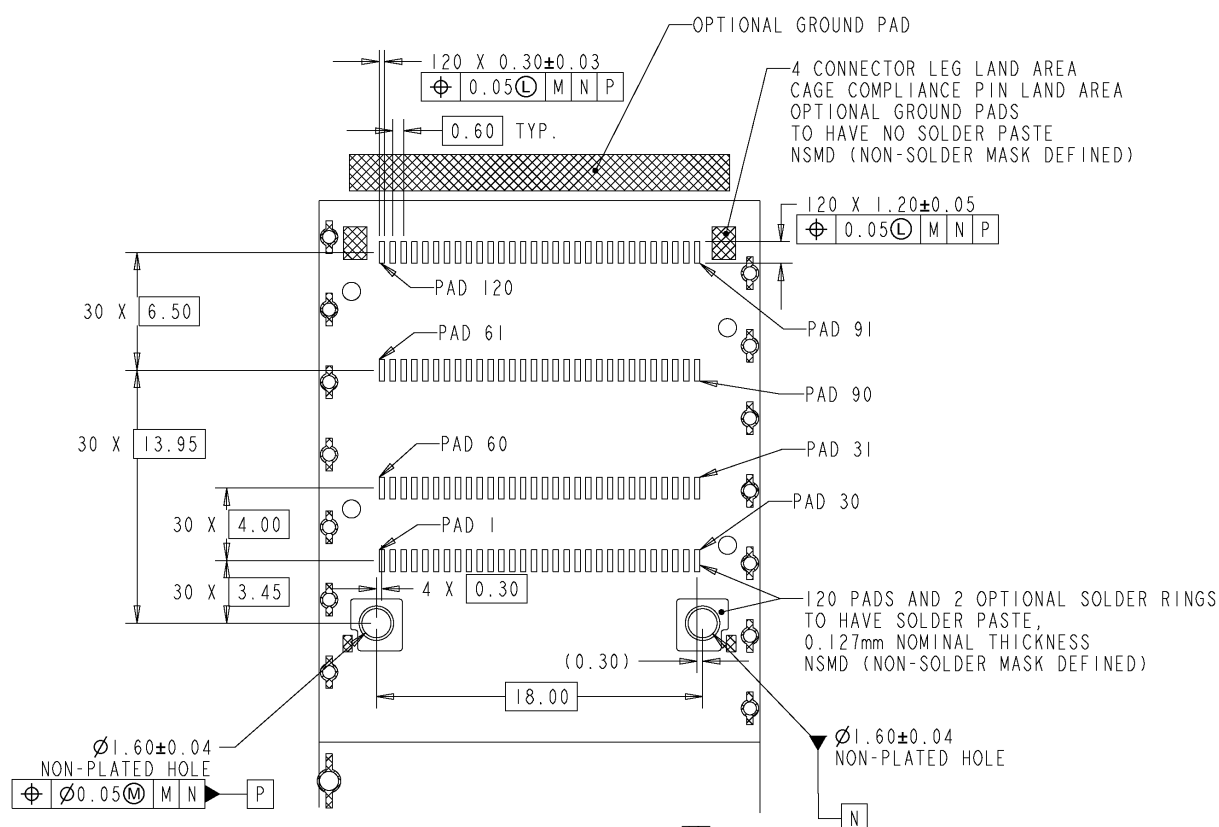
Host PCB layout (Detail SMT Footprint)
